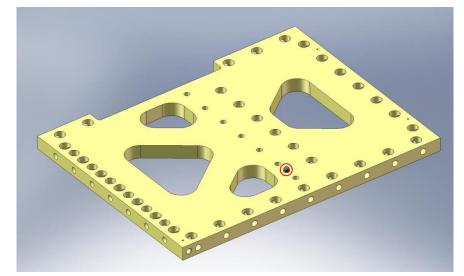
Dowel pin pressed into side of Radial Rib (D071068). Pin should sit .25" proud of surface.
